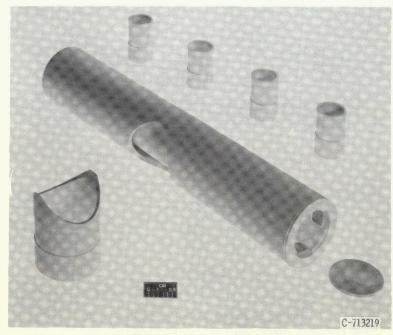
Glass-ceramic reactor parts prior to assembly into reactor housing.
